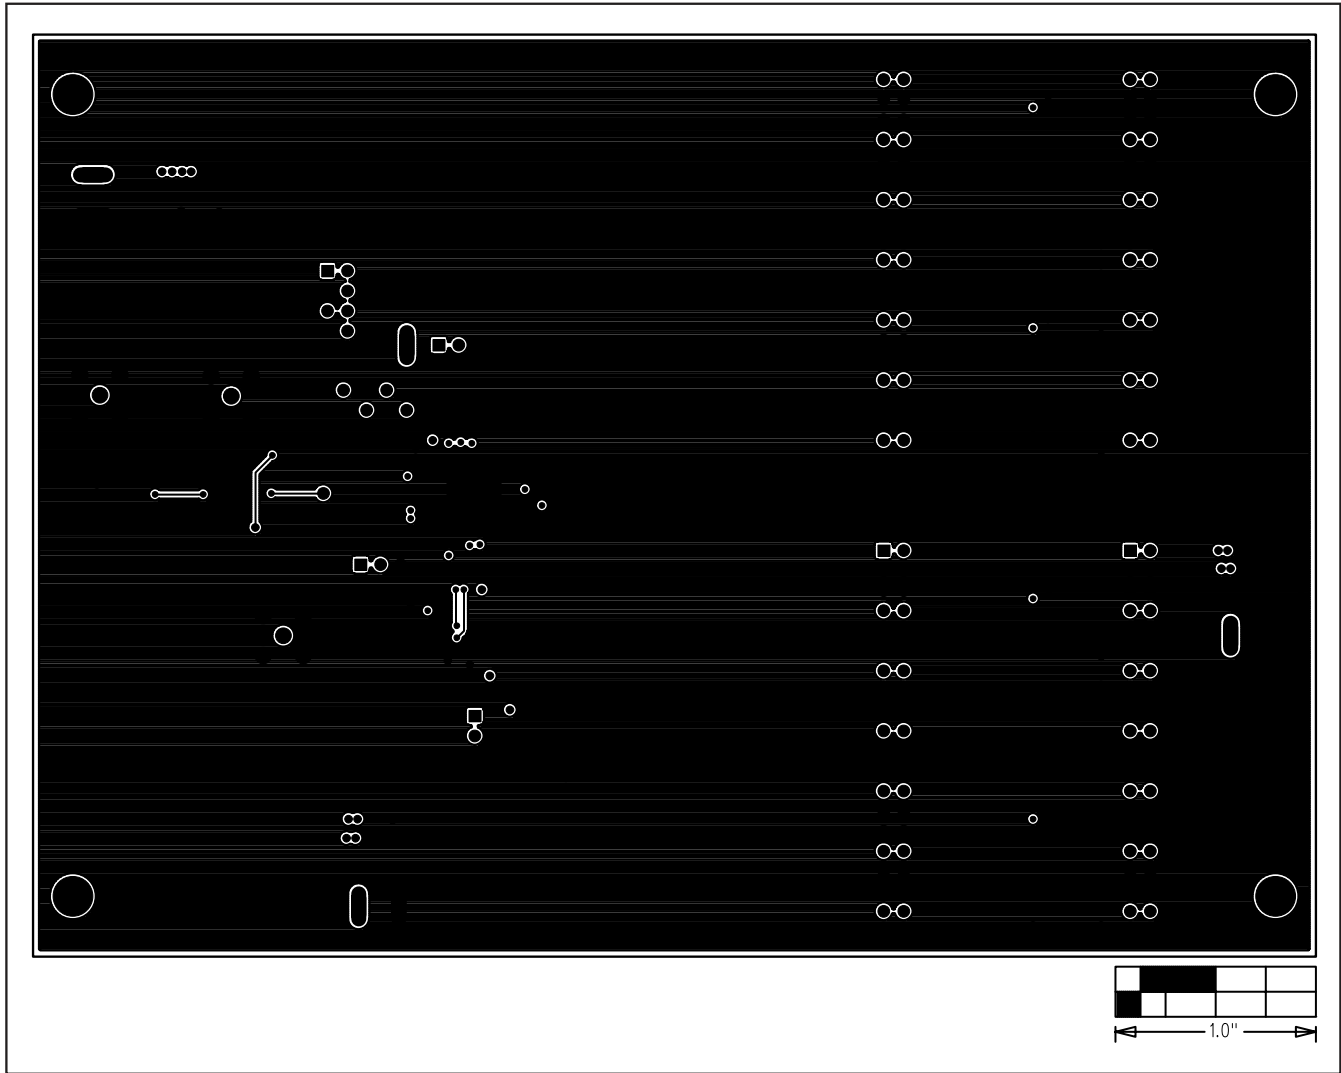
MAX1213/MAX1214/MAX1215 EV Kit PC Board Layout—Solder Side
